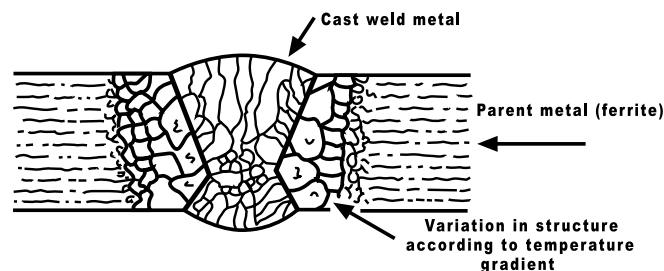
Typical welding structure of Ferritic Stainless Steels
